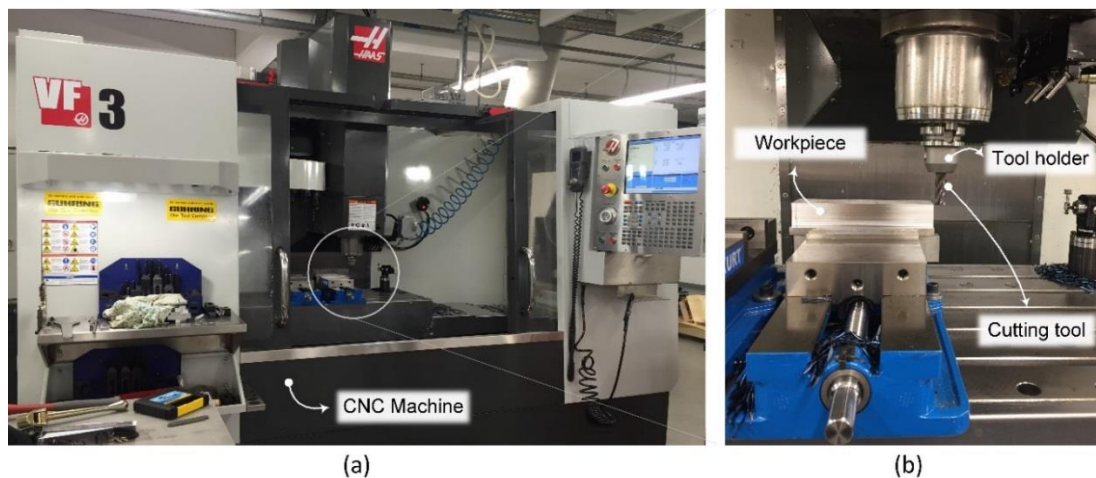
(a) Haas VF-3 vertical milling machine, (b) machined workpiece and cutting tool.
